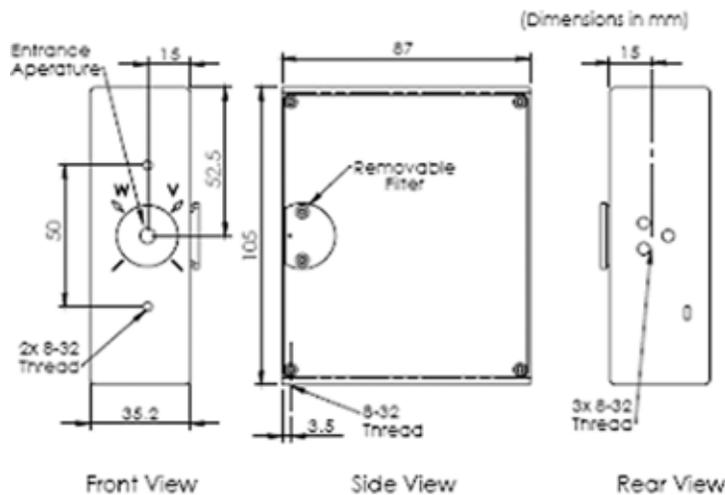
BM-3* Silicon-UV Detector Head Dimensions
